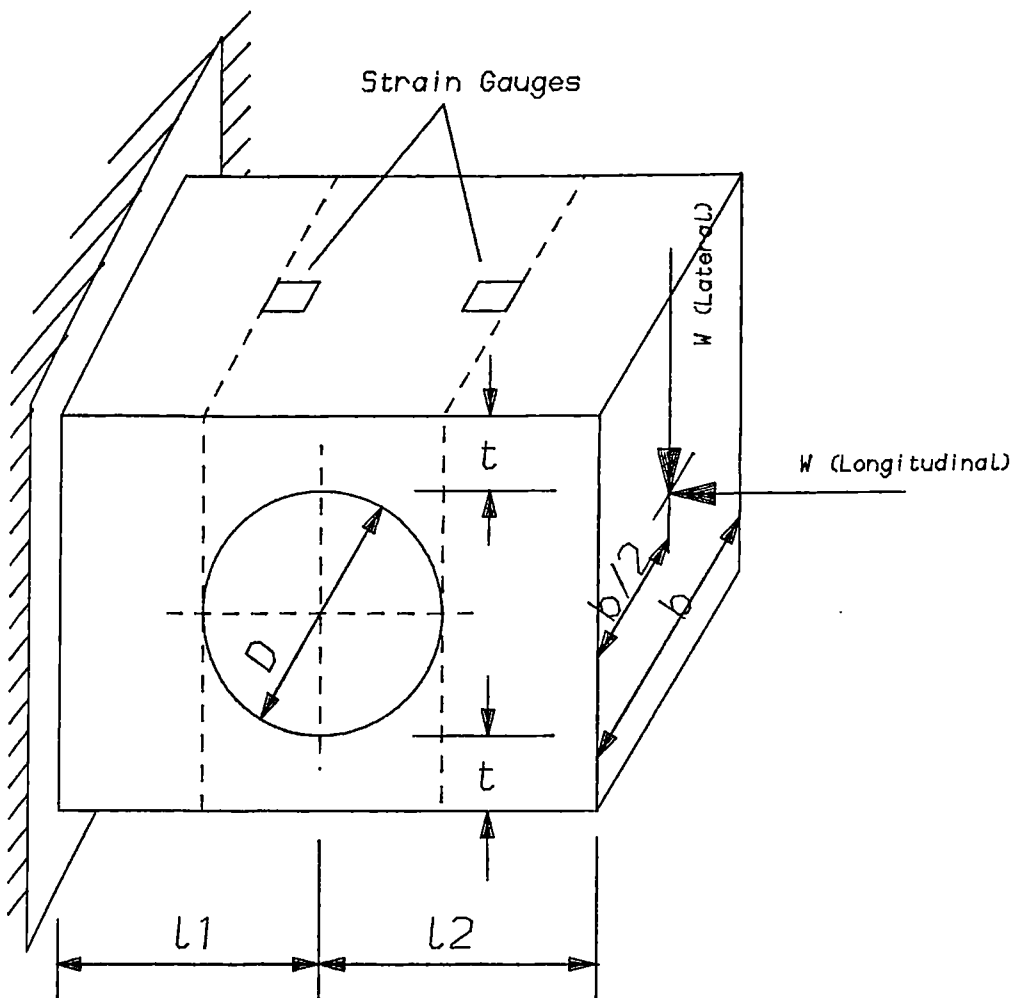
One Component Dynamometer with a Circular Hole [93]
